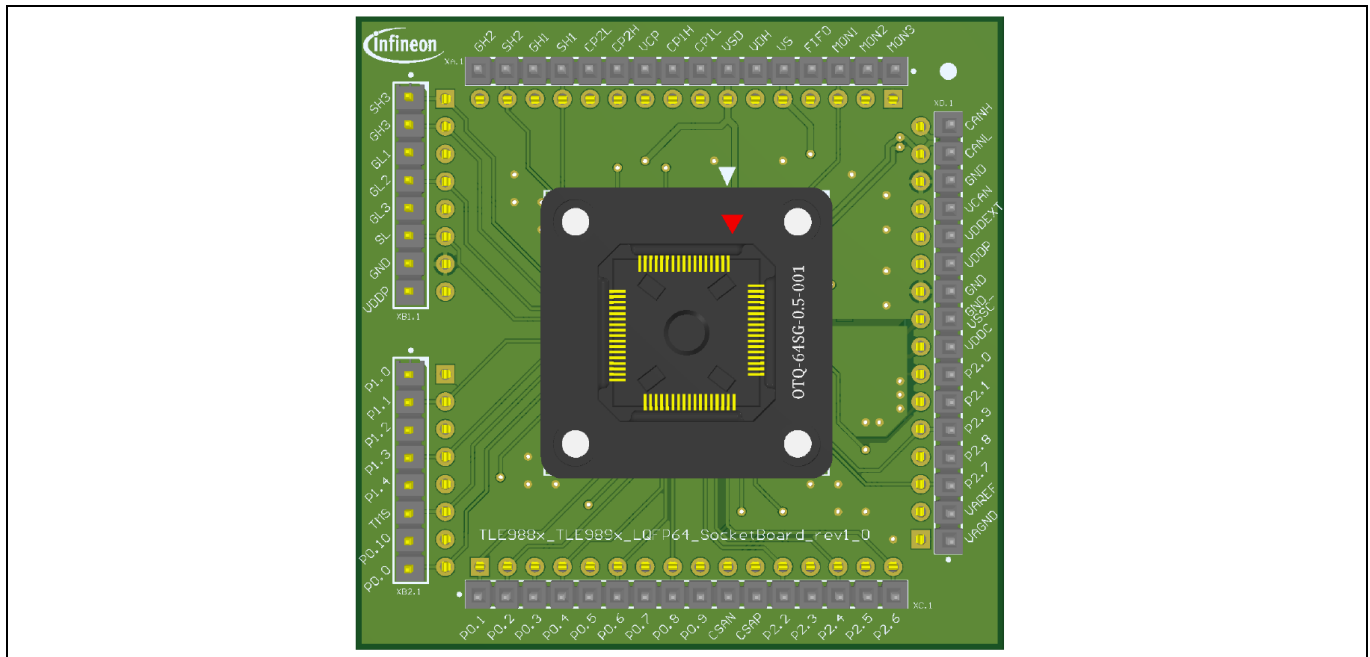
TLE988x\_TLE989x LQFP64 Socketboard (top view)
